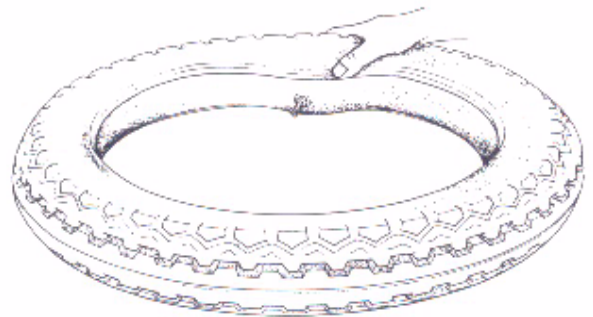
Cover and tube assembled ready for fitting to the wheel
